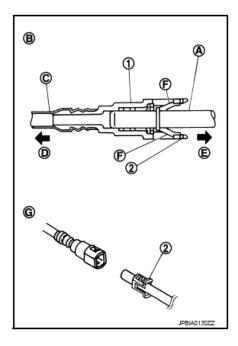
Disconnecting Quick Connector Courtesy of NISSAN NORTH AMERICA, INC.
